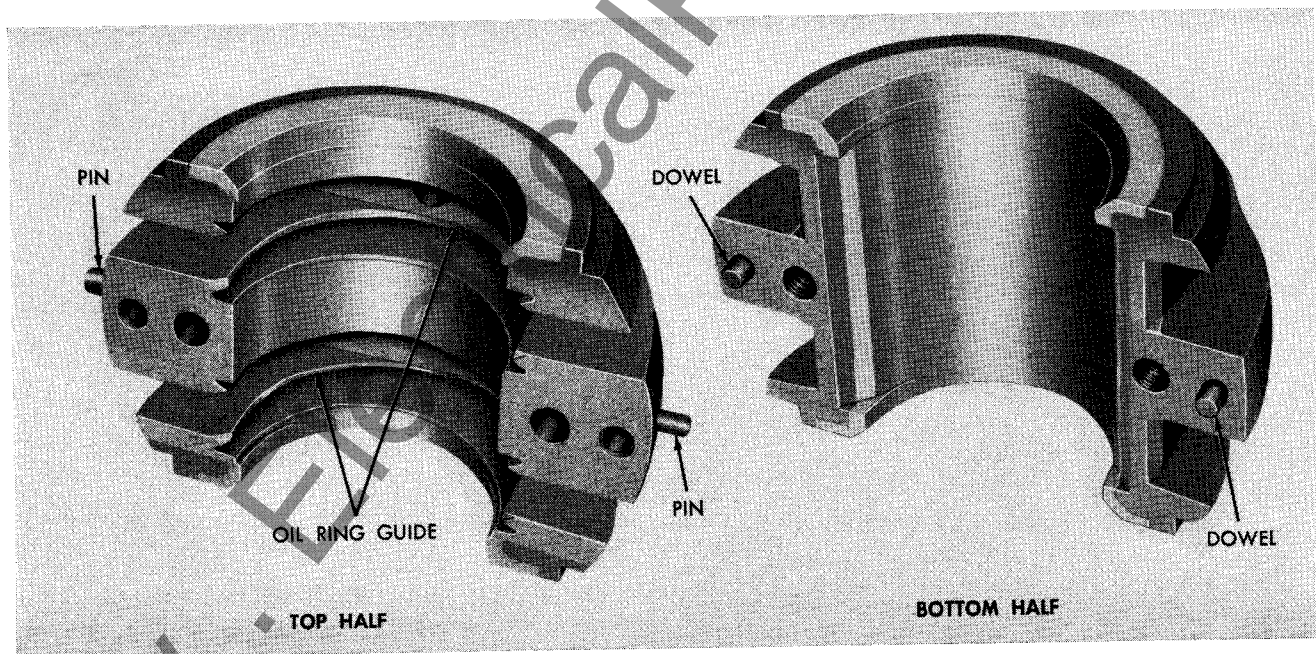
Spherical-Seat Bearing with Two Oil Rings
